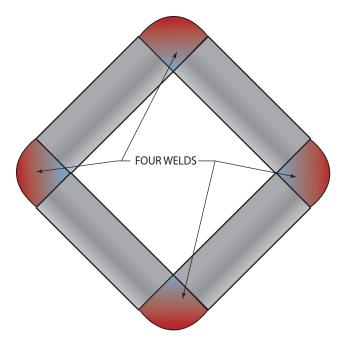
Box tube made from four outside corner joint welds.
